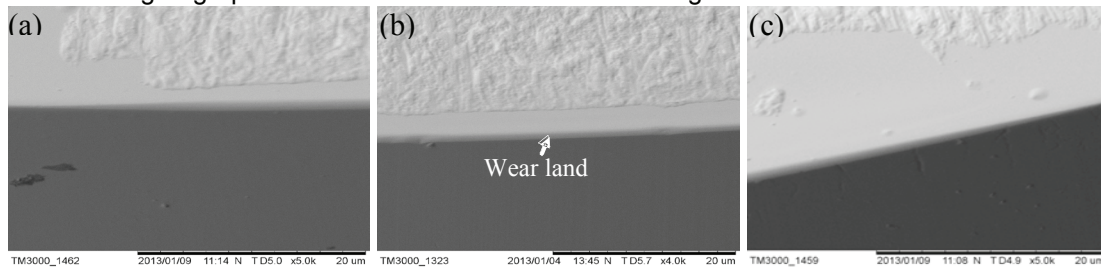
Tool flank wear topography at the left, middle and right sides of cutting edge
